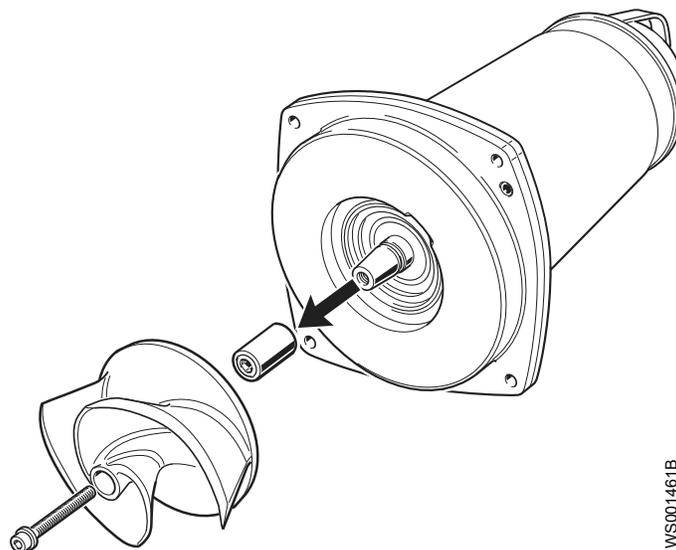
Removing the impeller and the conical sleeve. Generic drive unit shown.
